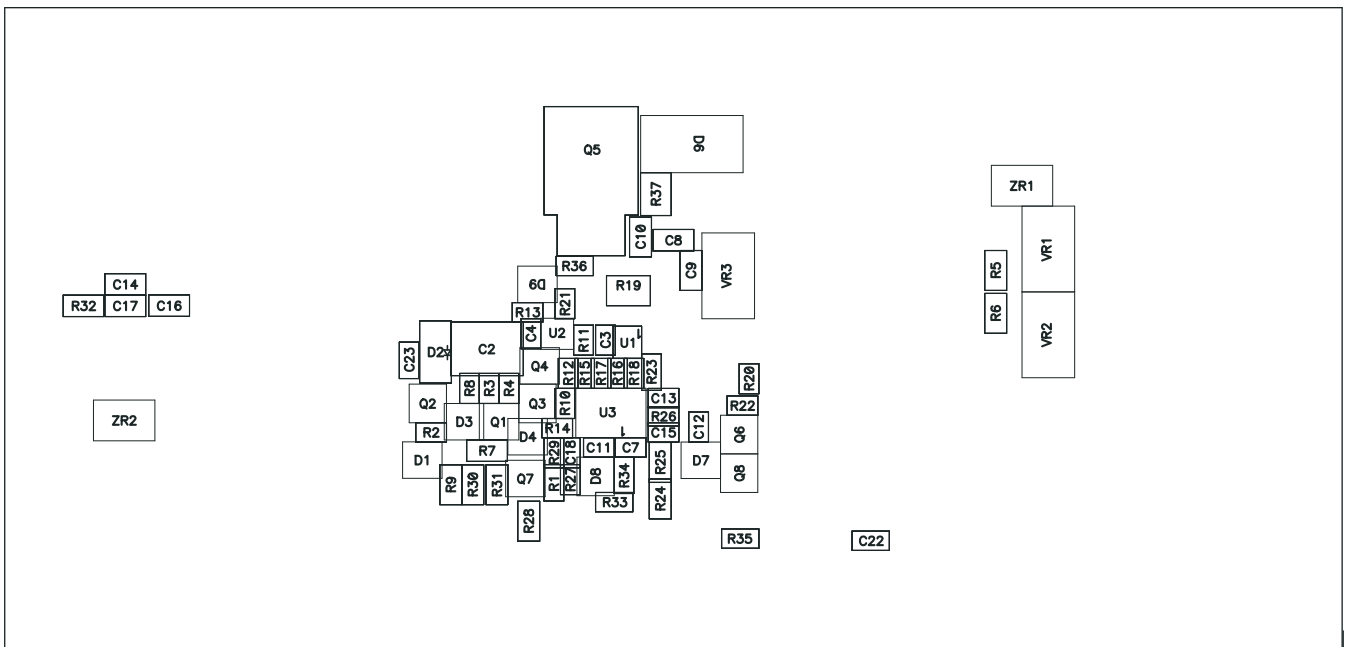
UCC29910AEVM-730 Bottom Assembly Drawing (bottom view)
